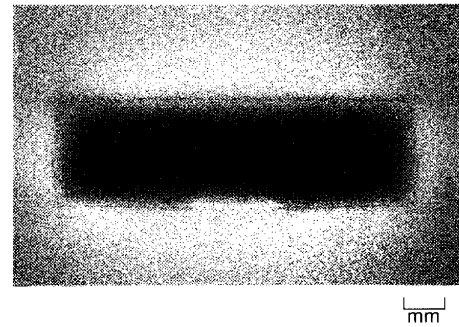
An example of Kr^{85} penetration test image of the Cu alloy leadframe package after 50 cycles (The packages were manufactured in a standard assembly process)
